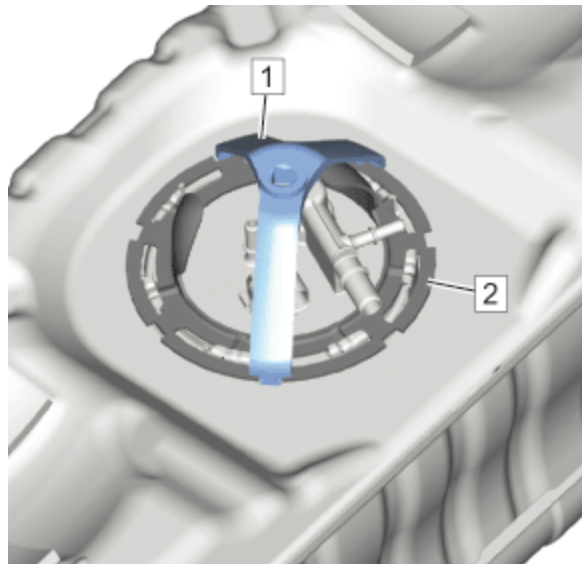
Fuel Pump Module Lock Ring And Wrench
